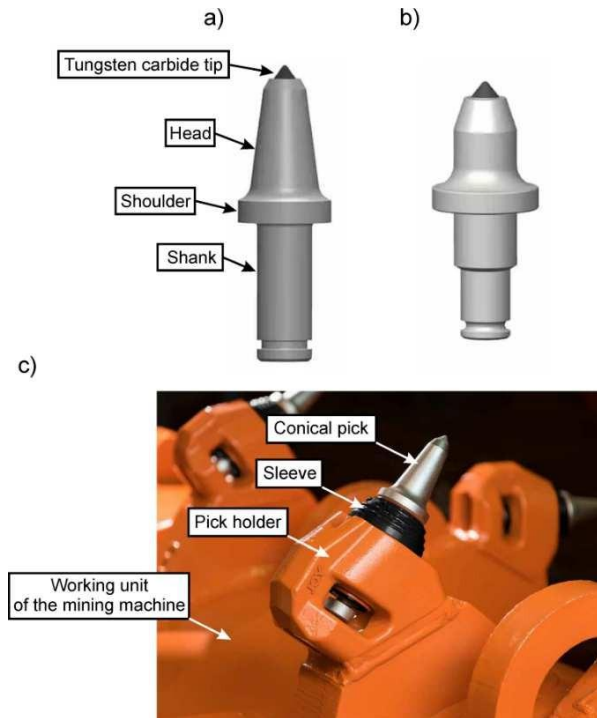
Conical (point-attack) pick: a) U85/U85HD with a single shank (<https://www.jyfmachinery.com/product/u85-u85hd-style-cutting-picks-fitting-underground-mining-and-surface-mining>, 2020), b) TS30C with a stepped shank (<https://www.jyfmachinery.com/product/ts30c-cutting-picks-fitting-underground-mining-and-surface-mining>, 2020), c) mounted in a pick holder equipped with a sleeve (Komatsu, 2020)
